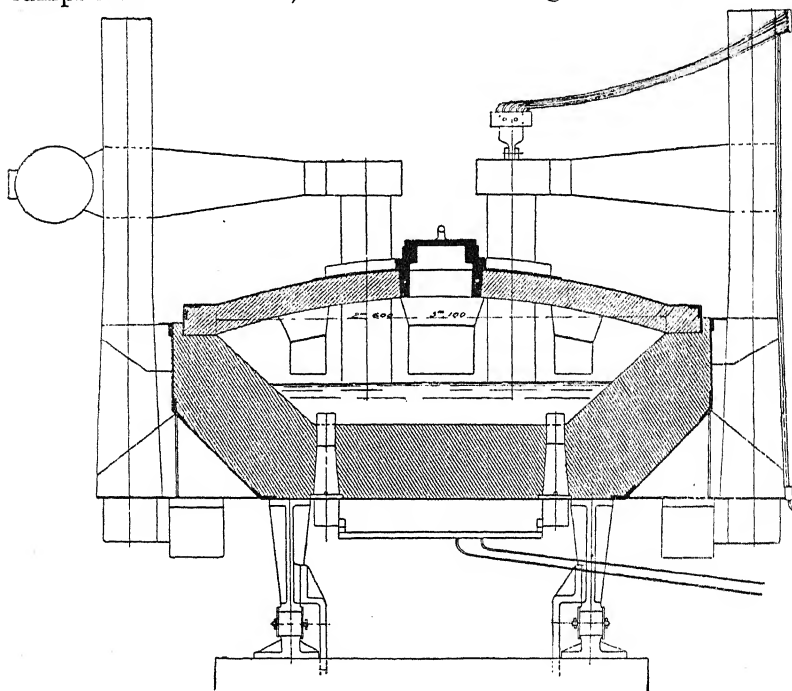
SECTIONAL ELEVATION OF 12-TON GIROD ELECTRIC FURNACE.
